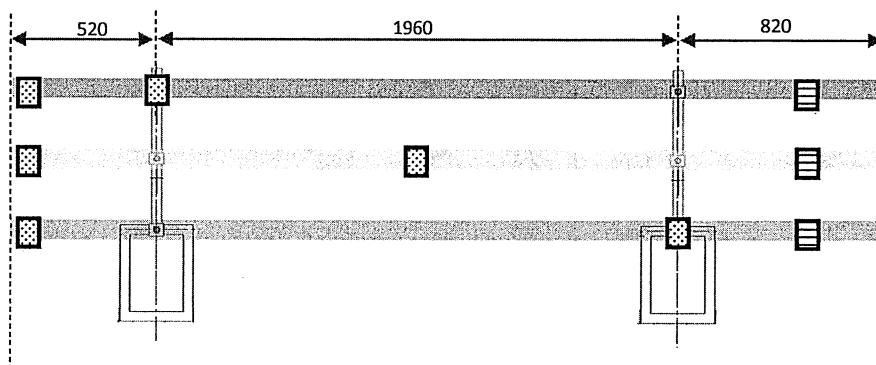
Front view showing busbar layout and mounting detail for TRF-1
